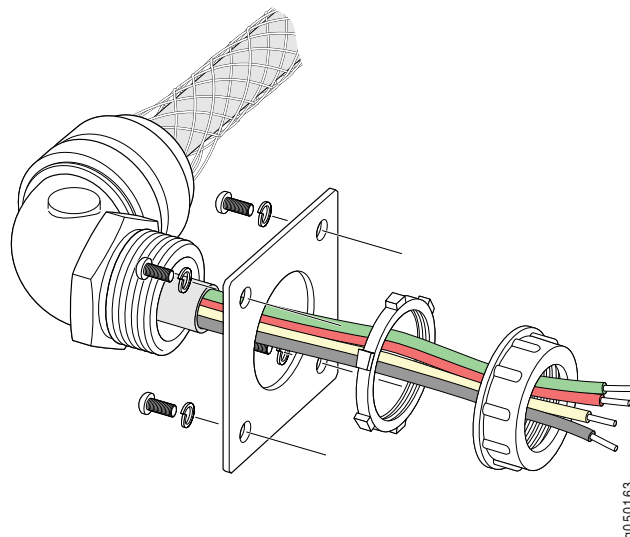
Wye Wiring Tray with a 90° Connector Installed
